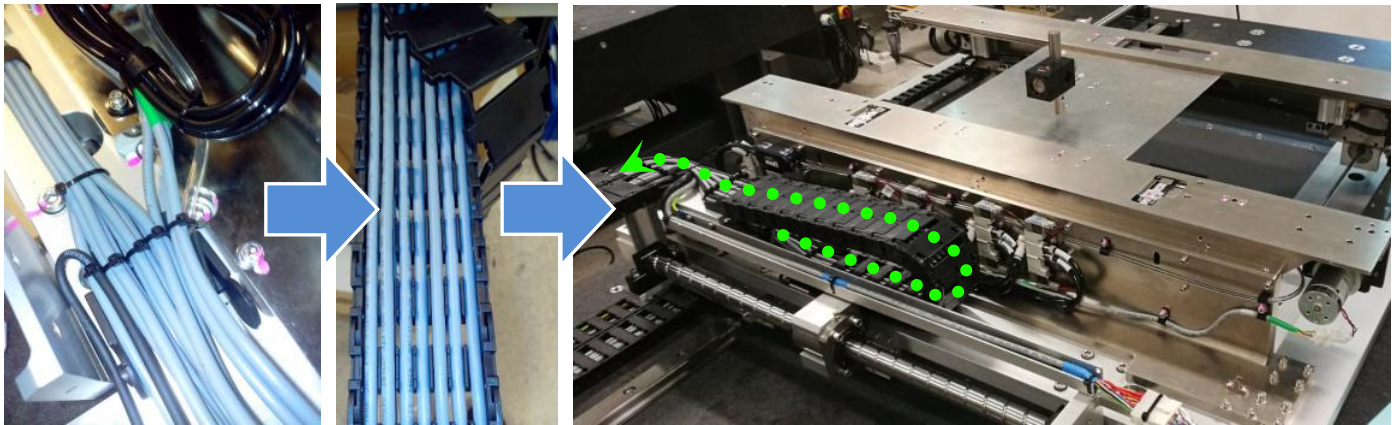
Stepper Motor Cable Routing (X Axis E-Chain)-Reference Picture Only
